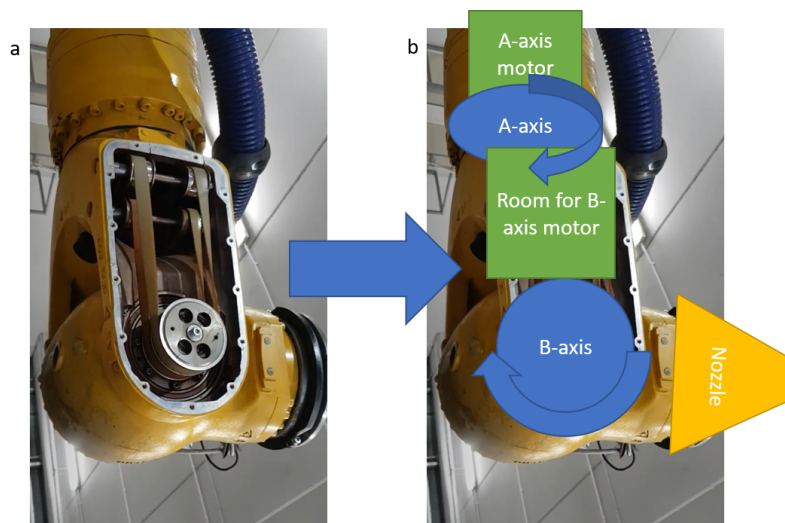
Robotic wrist used as basis for print-head design: (a) Kuka KR 500 wrist; (b) Proposed print-head layout overlaid
